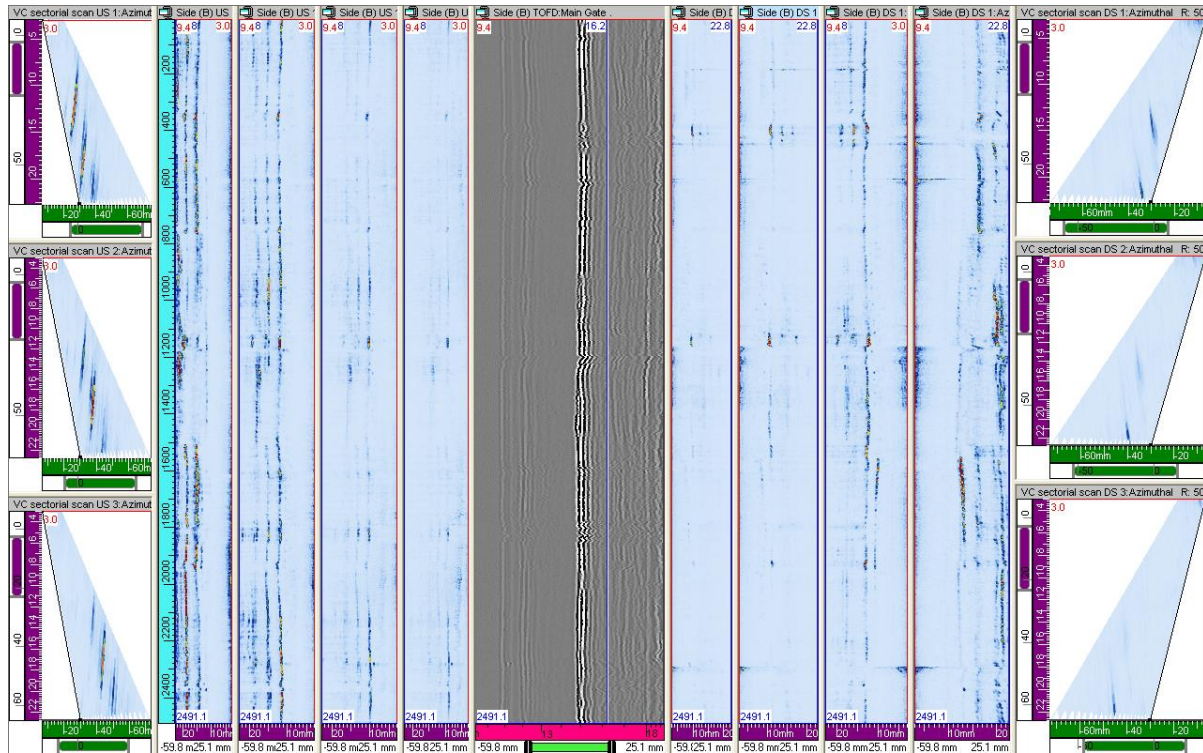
Weld MLA 4925 - EWI LPA Scan Screen Capture
